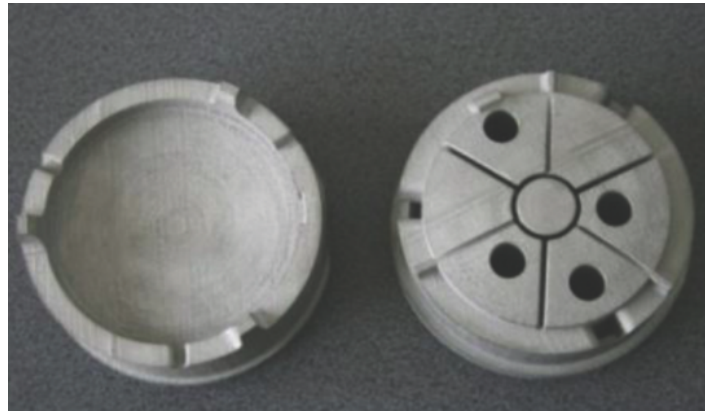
The injection moulding tools manufactured by SLM [103].
